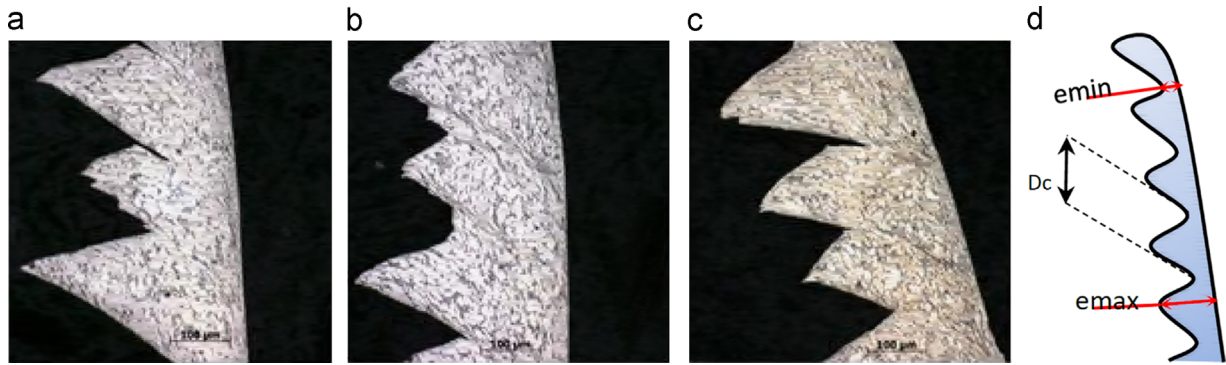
Chip morphology for different laser powers: $V_c=40$ m/min, $f=0.2$ mm/rev (a) CM (b) LAM $P=500$ W (c) LAM $P=1000$ W, (d) chip morphology illustration.
